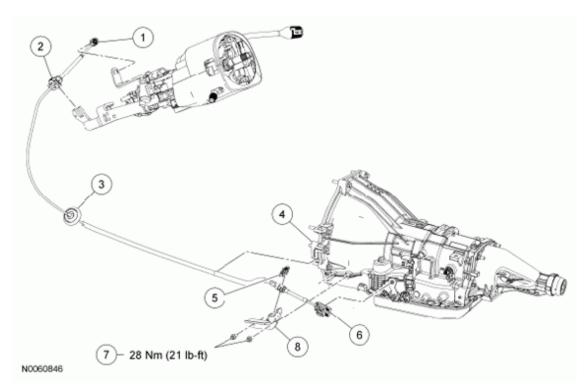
Locating BSIA Solenoid Bolts Courtesy of FORD MOTOR CO.
